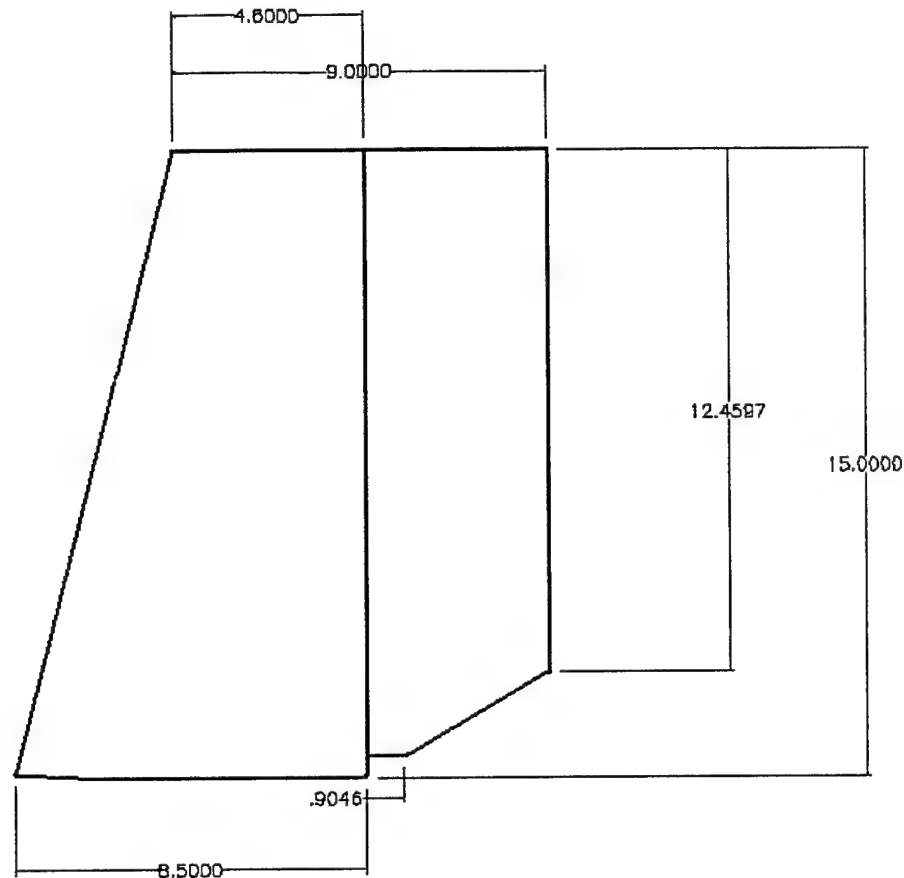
Dimensioned Drawing of the Vertical Tail
